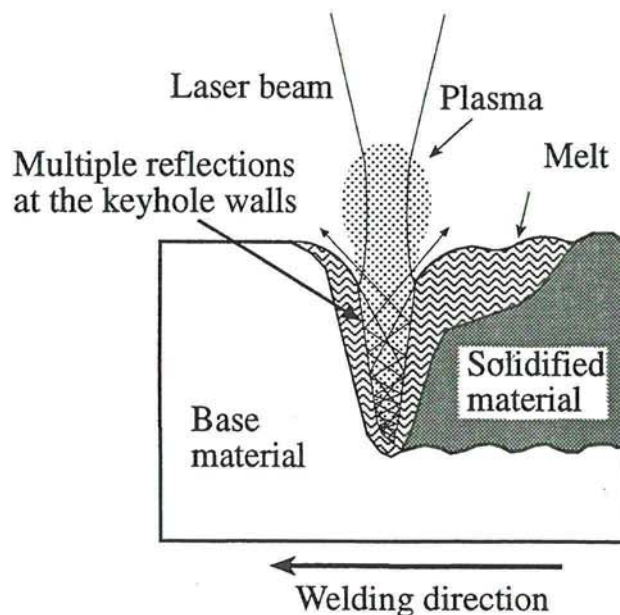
Schematic of the deep penetration laser welding process.
